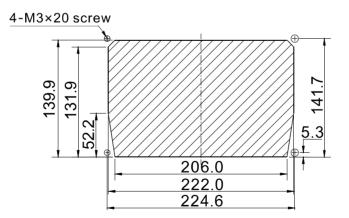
Dimensions of opening and fixing holes for flush mounting
